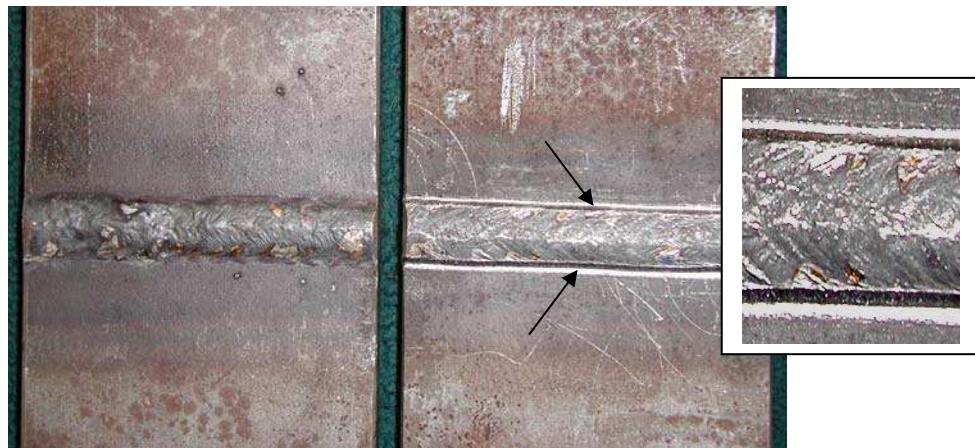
The view of the butt welds in as-welded condition (left side sample) and after application of UP (right side sample) [7]. Notice the formation of a uniform, shiny groove along the weld toe marked with arrows and shown in greater details in the insert.
